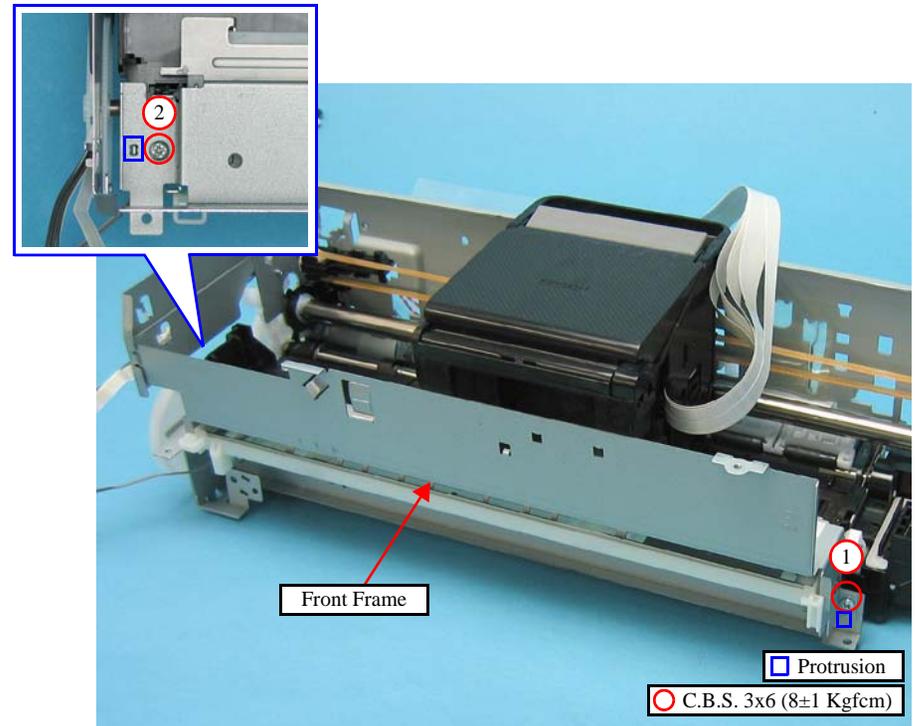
Removing the Paper Eject Frame Assy (1)
